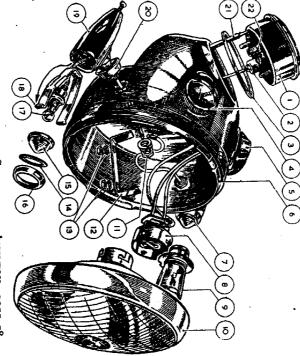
Headlamp and Speedometer Assembly—1955-58 Models.
